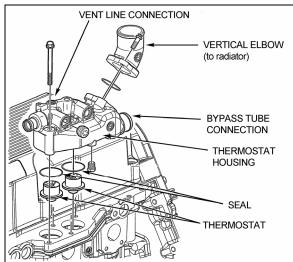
THERMOSTAT HOUSING (DDC S60 ENGINE)
